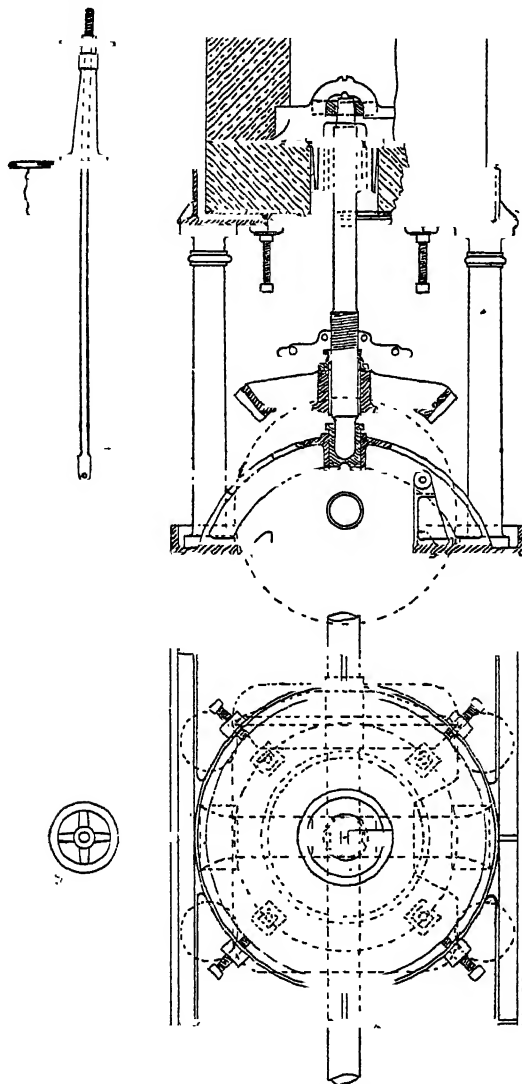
Millstones and Driving Gear—Sectional View and Plan.
